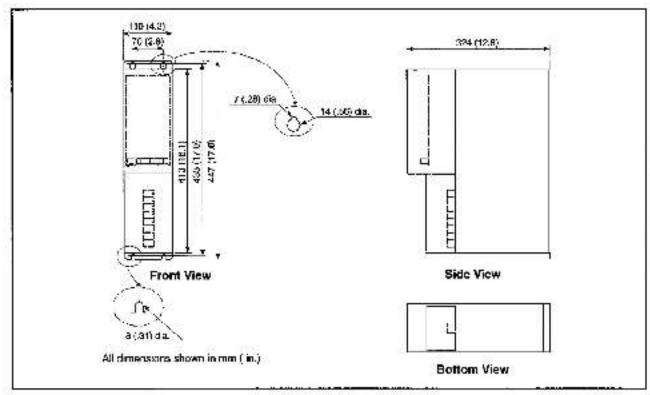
Model 2SR20450 and Model 2SR40700 Braking Unit Mounting Dimensions
